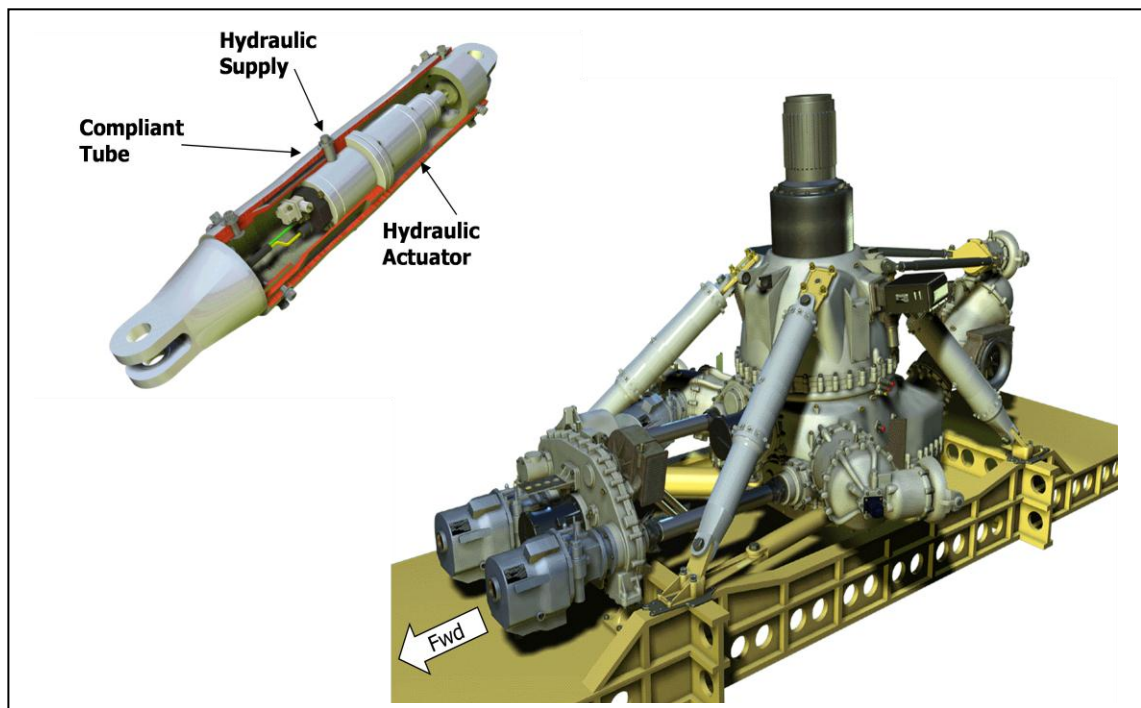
Single strut cutaway showing a single hydraulic actuator (left) and gearbox with four struts (right). Image copyright AgustaWestland Limited.
